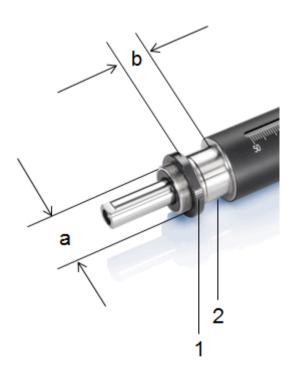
Relevant components and dimensions for installation in the mechanical mounting (schematic)
